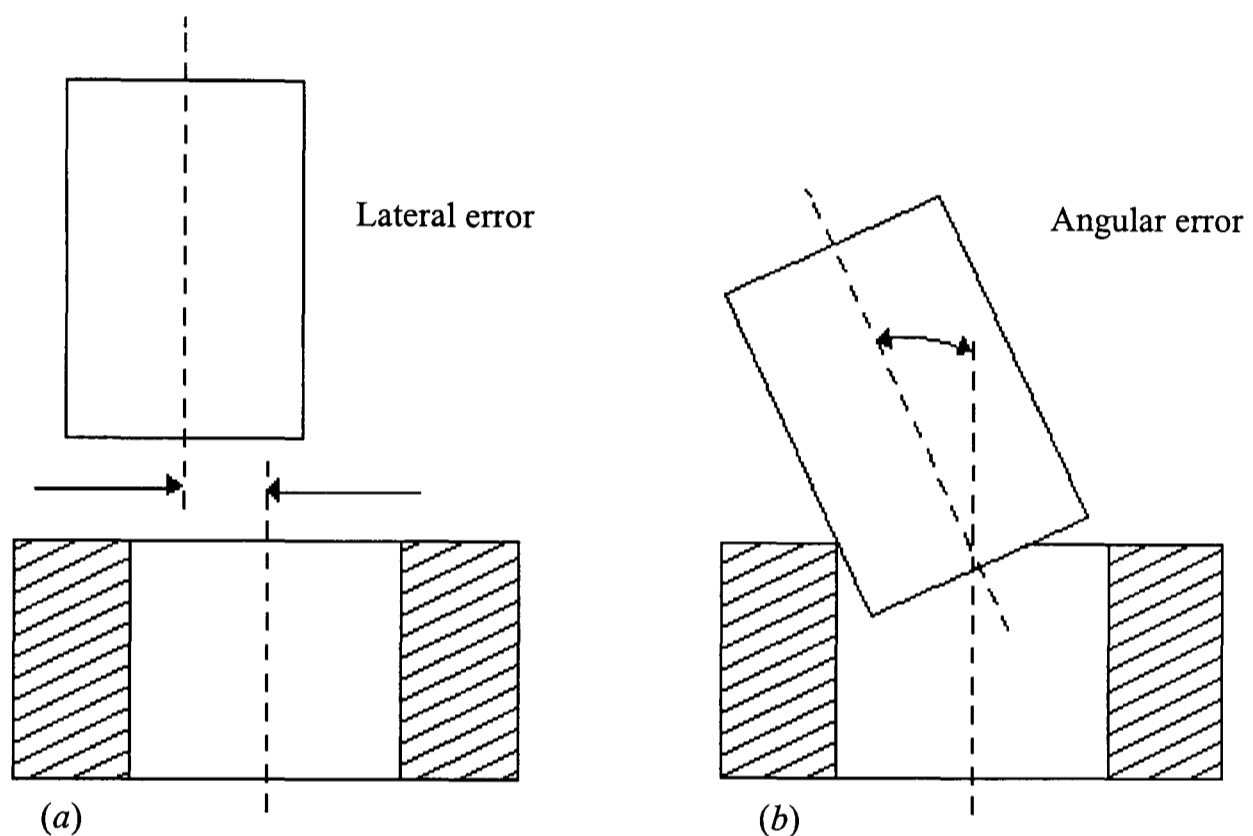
Misalignment of parts during an assembly operation, (a) lateral error and (b) angular error
